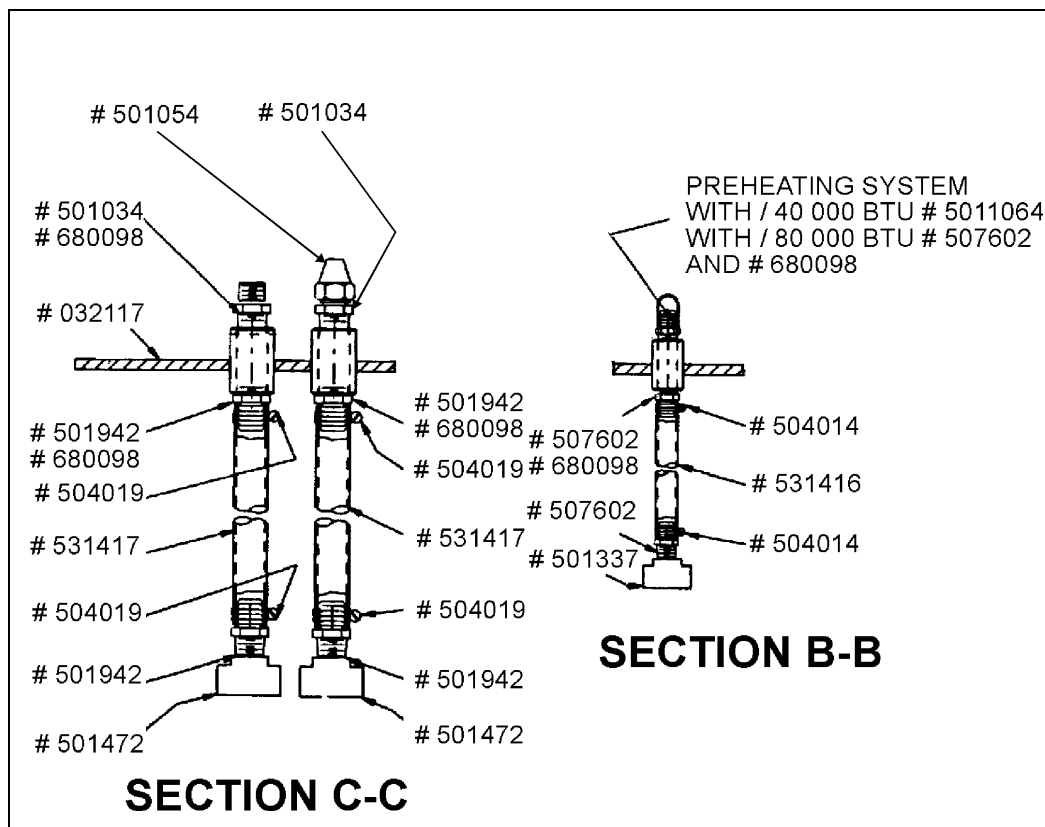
PICK-UP (SUCTION) TUBES ASSEMBLY
